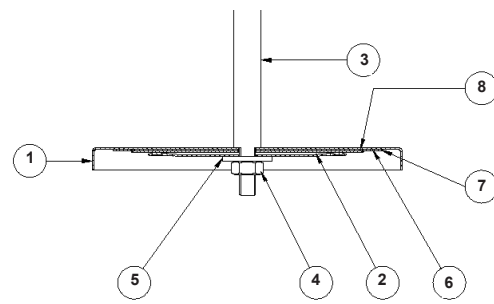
Type 4040H Pressure and Vacuum Relief Valve Assembly
